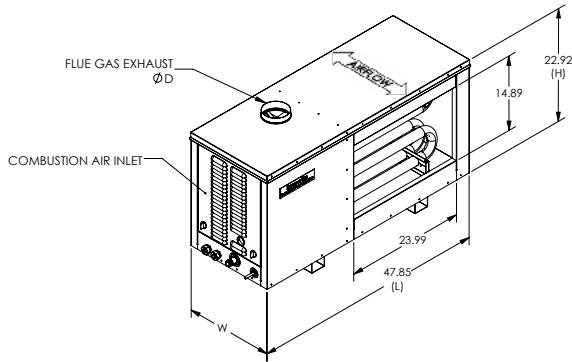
IN-SI (SEPARATE INLET EXHAUST INDOOR)
